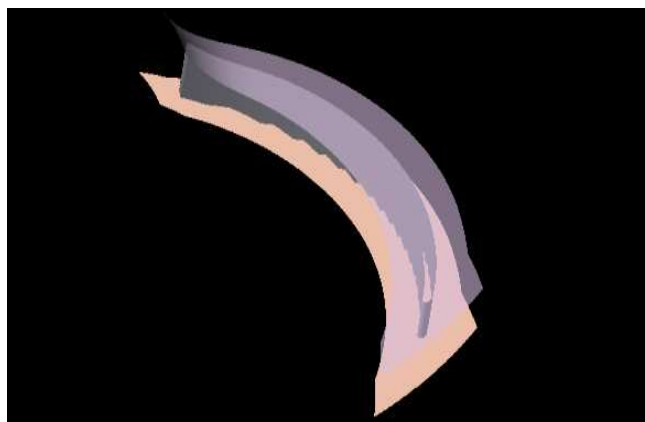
Hub, Shroud and Blade Profiles of an Impeller
